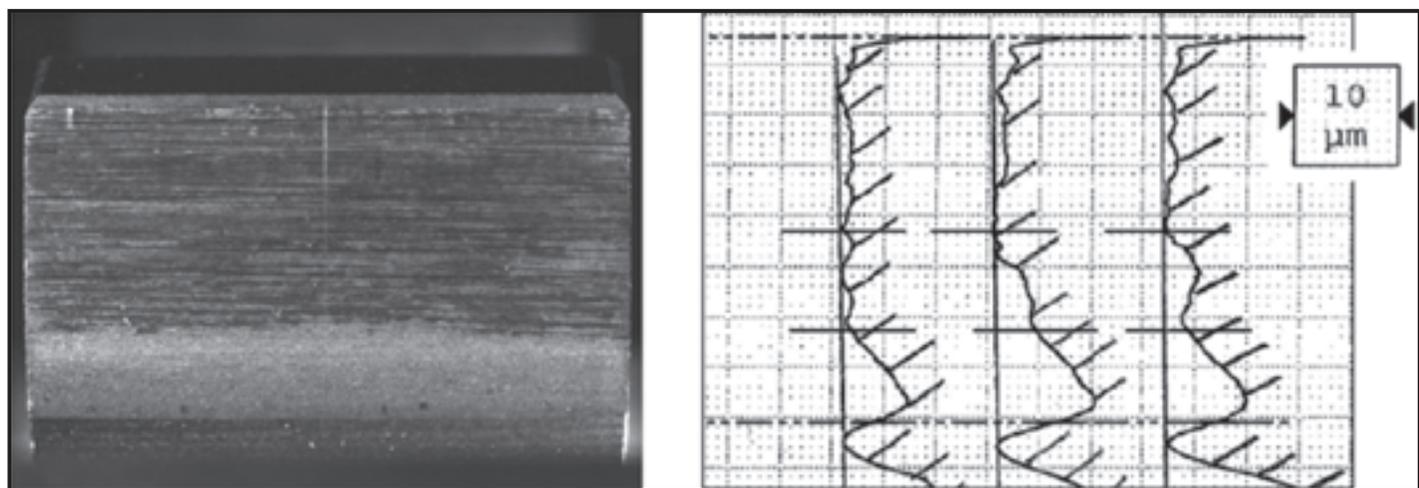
Micropitting gear failure of an industrial gearbox.
